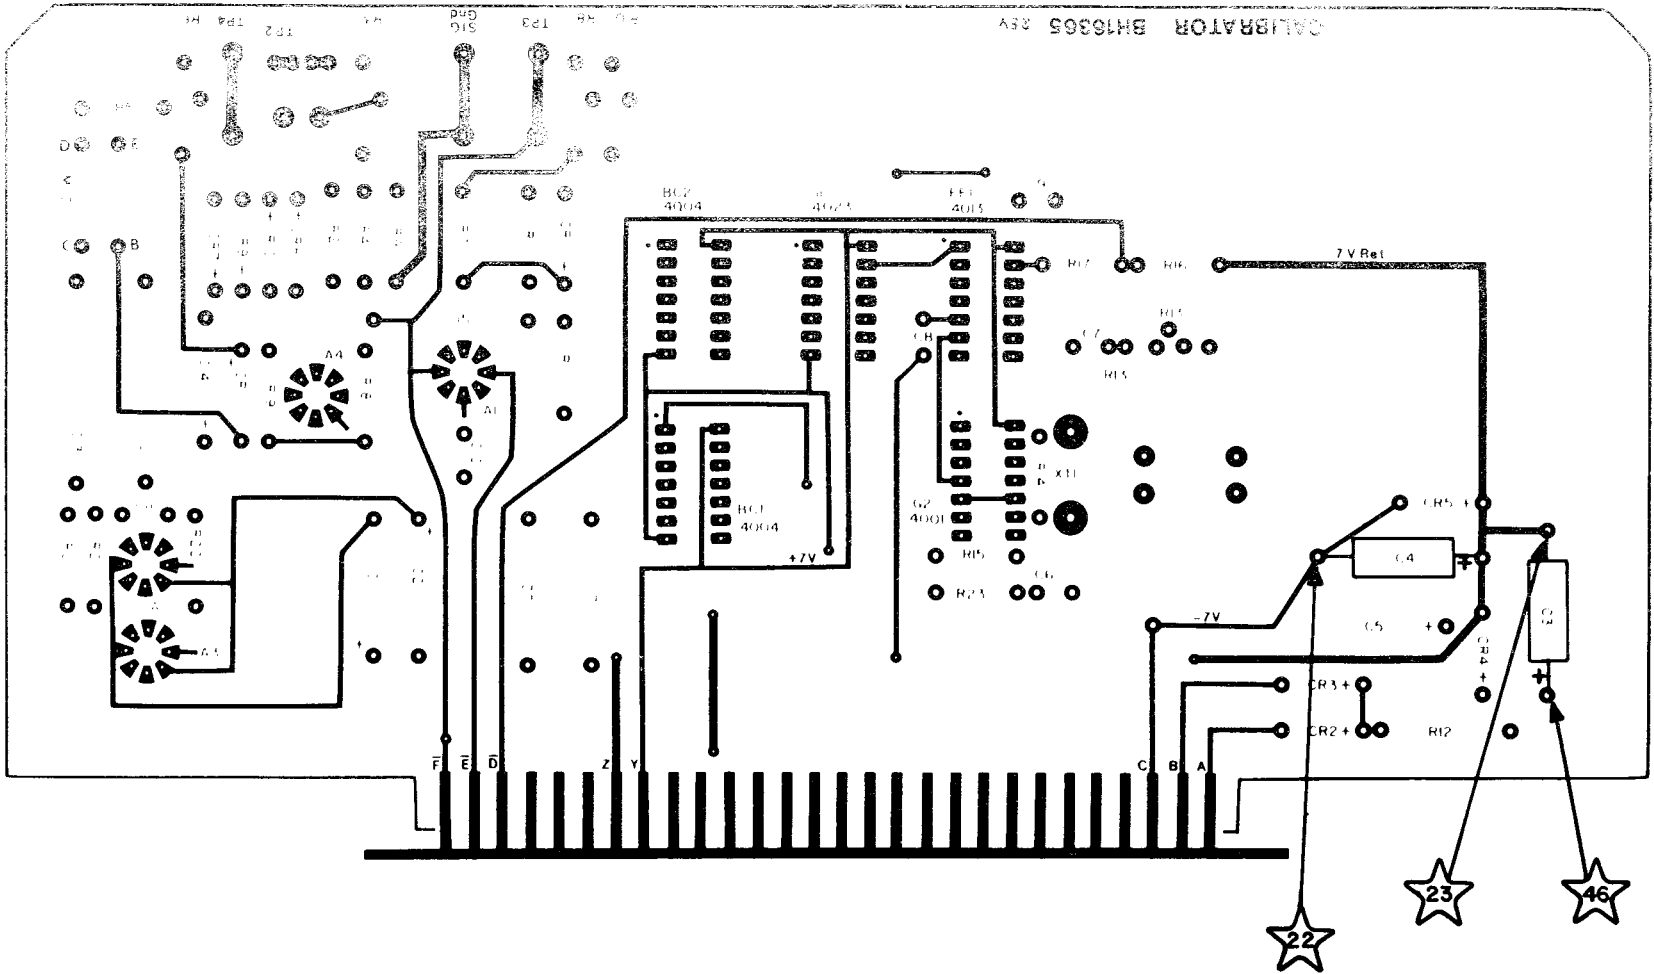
Calibrator Board, BH16365-1, Test Points
